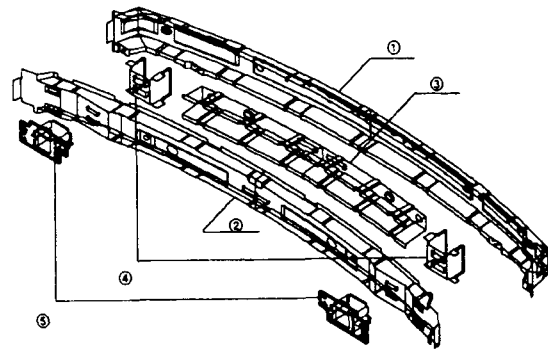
Components of the reinforced spot welded bumper beam :
